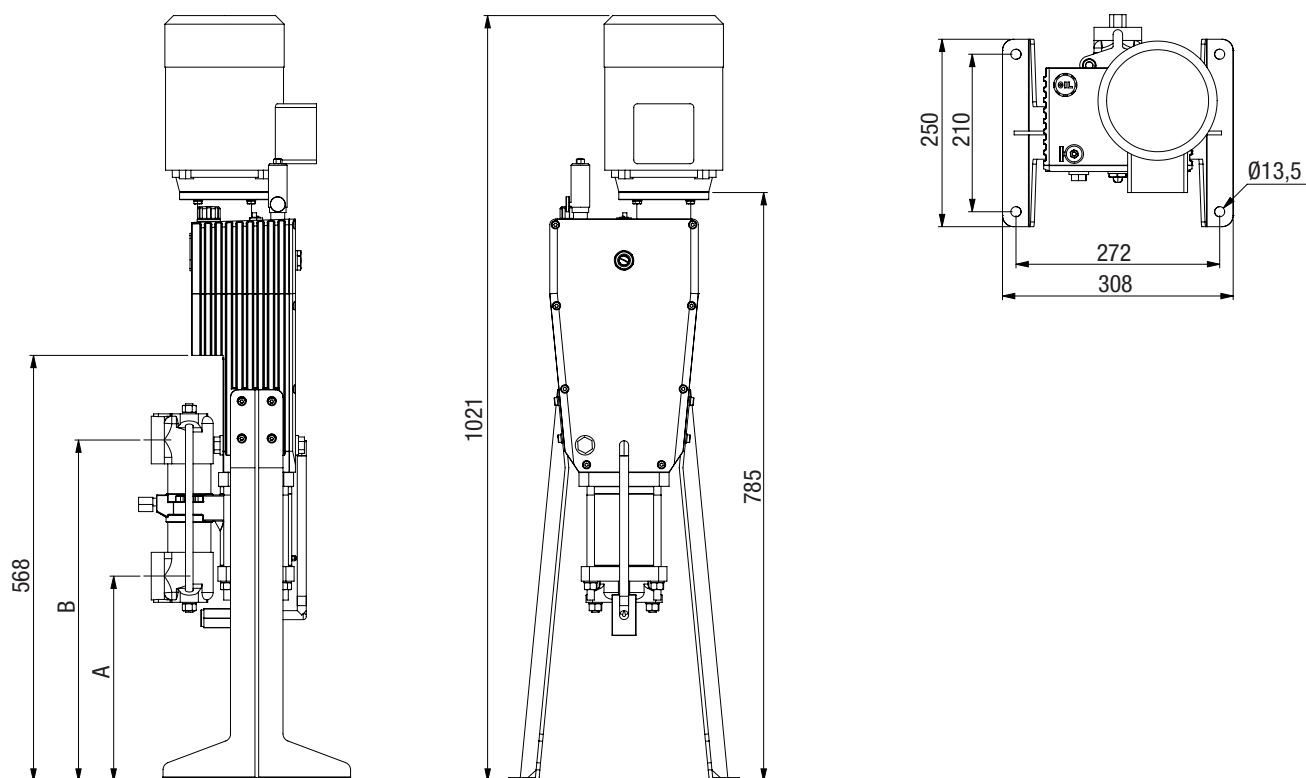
Dimensional drawing MEMDOS KMS LB/LA
